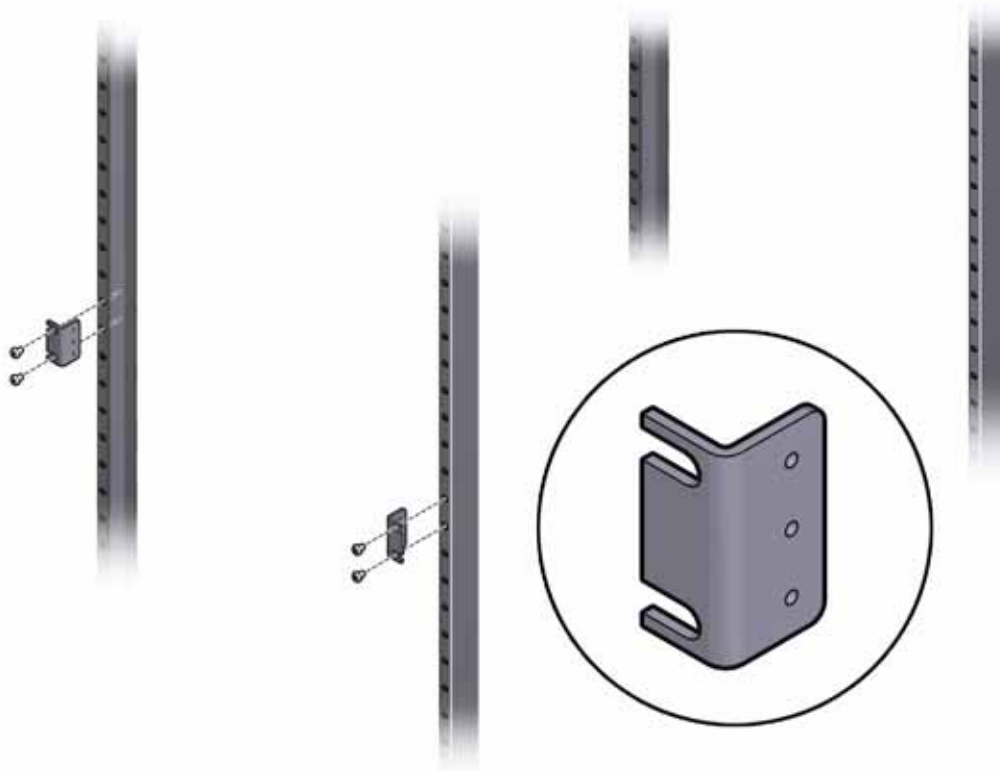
Attaching Rear Angle Brackets to the Equipment Rack
